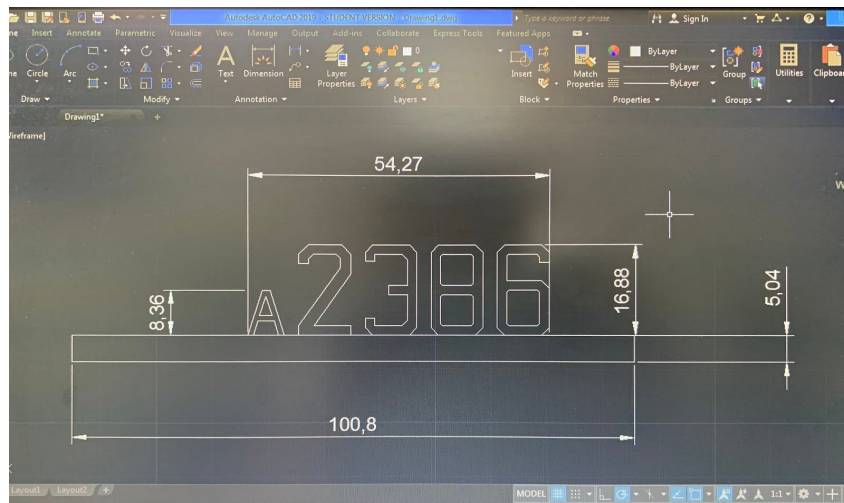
Reattempt Autocad Drawing of House Plate Design
